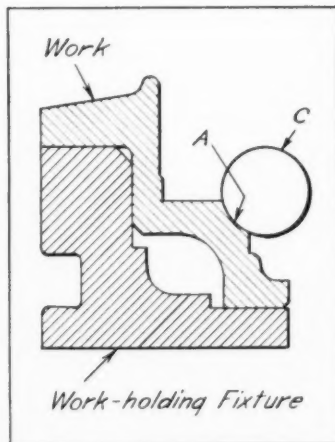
Cross-section of Ball Race and Fixture Shown in Fig. 1
